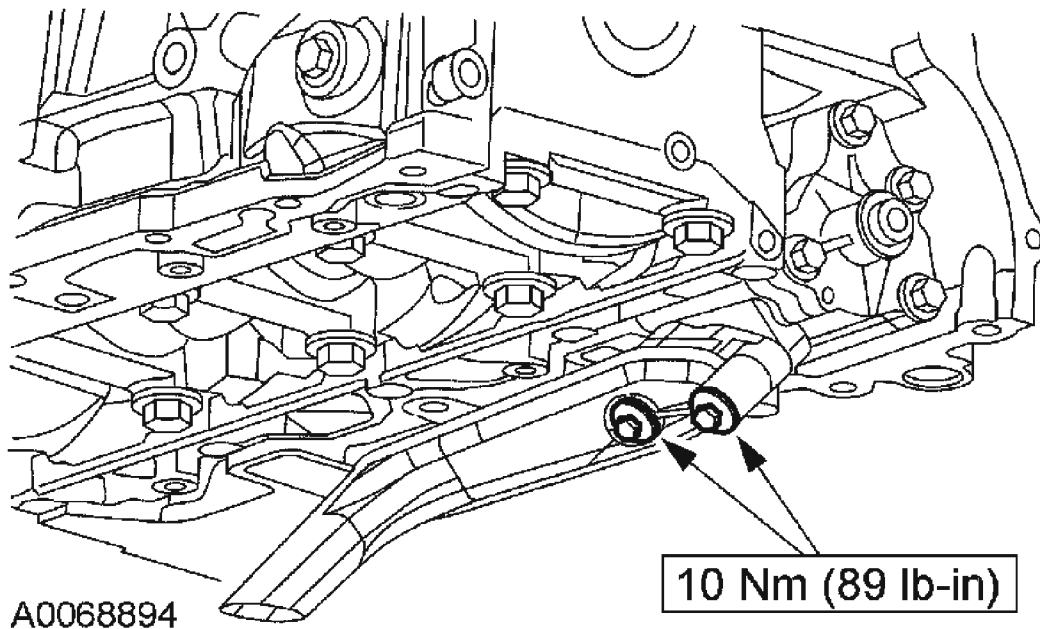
Installing Oil Pump Screen And Pickup Tube Bolt
